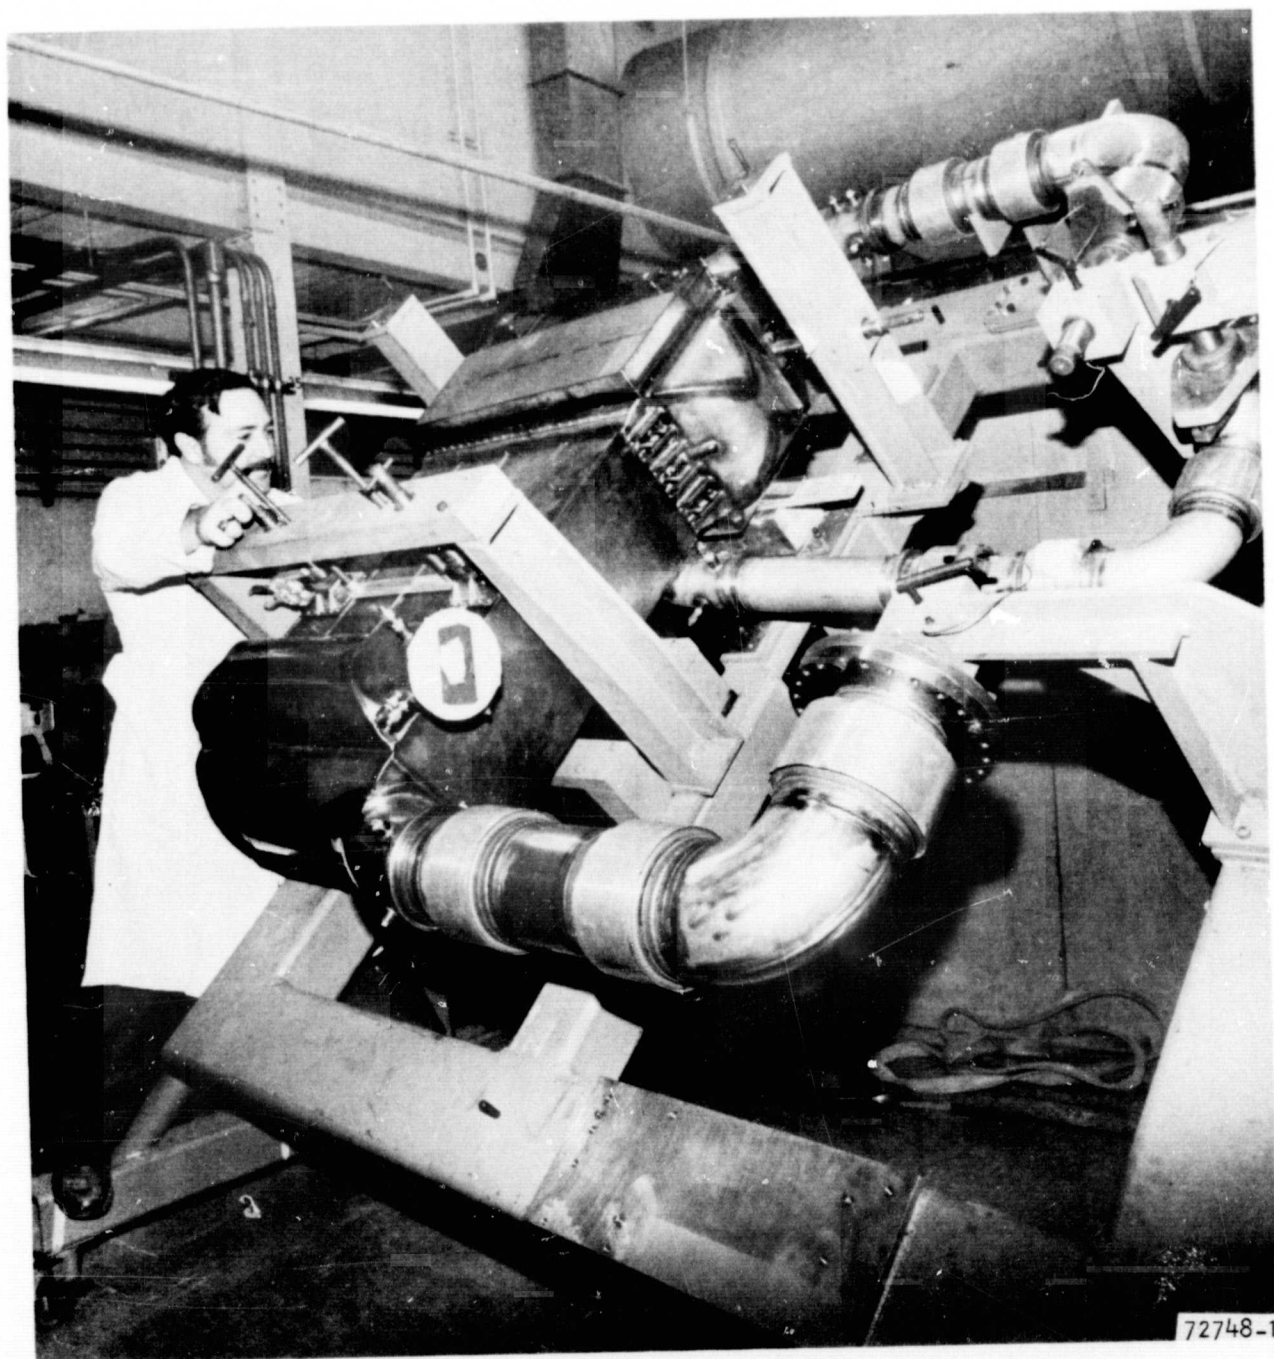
BHXU-Alternate Heat Exchanger Assembly
